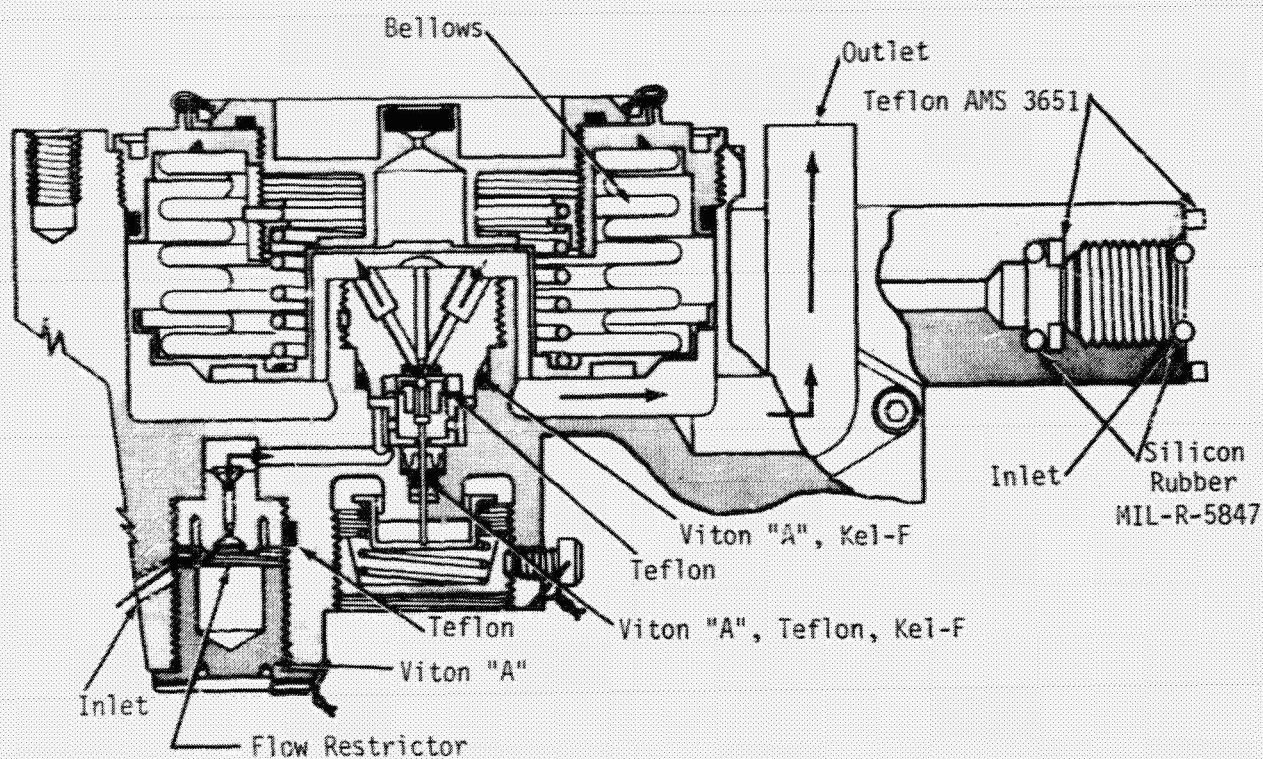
Primary Oxygen Regulator Assembly - Cutaway View.
